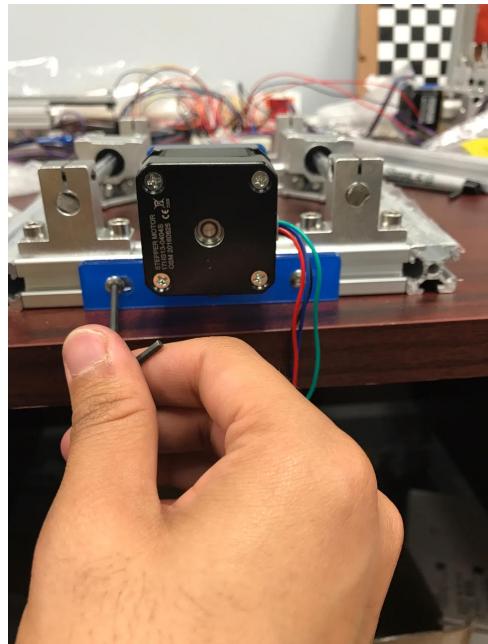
Use M4x8 bolts and M4 T-nuts to assemble the motor to the base. You will need to use 2.5 mm hex key for this
